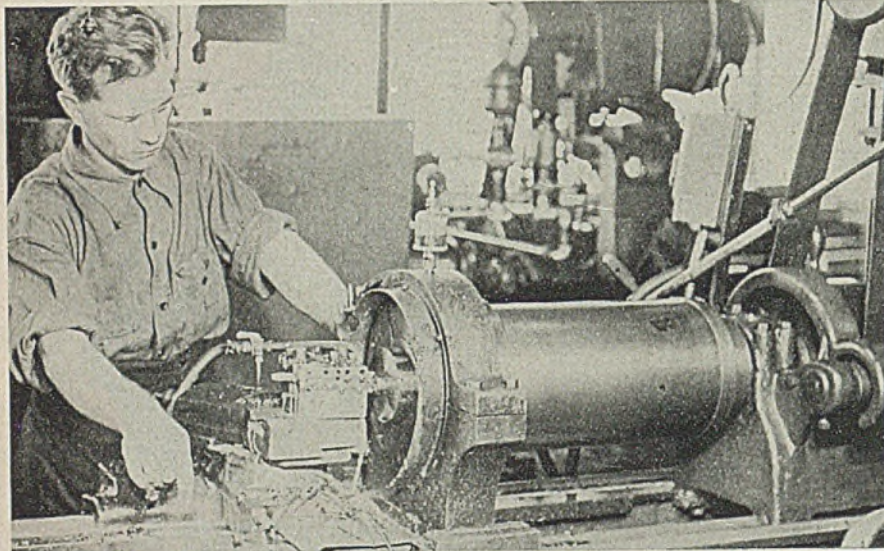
Base is finish faced and lug is turned and chamfered in operation 37, Table I, shown here. Work is positioned against stop bar in collet center. Girls now operate these machines
